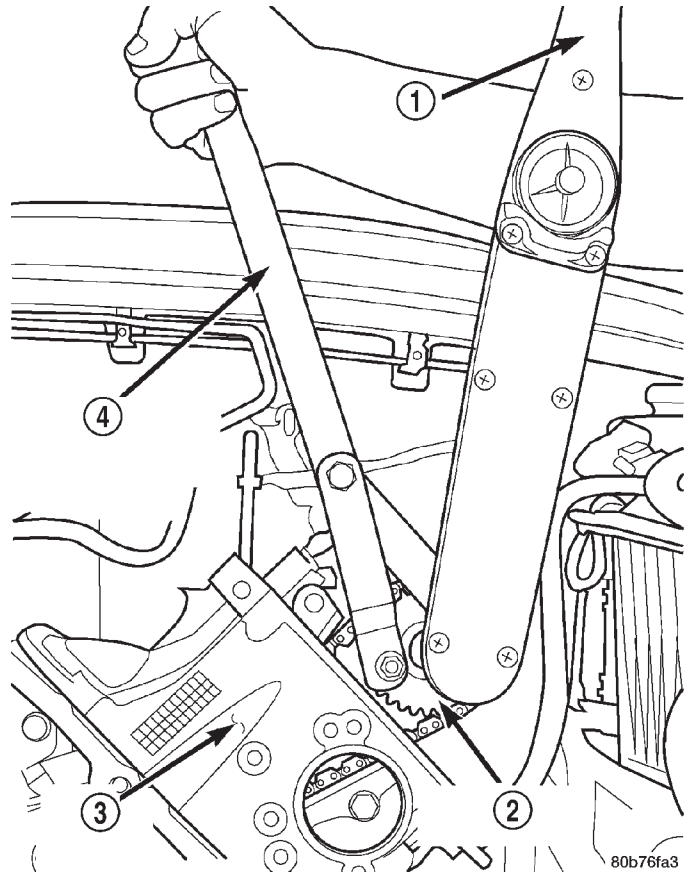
Tightening Left Side Camshaft Sprocket Bolt
